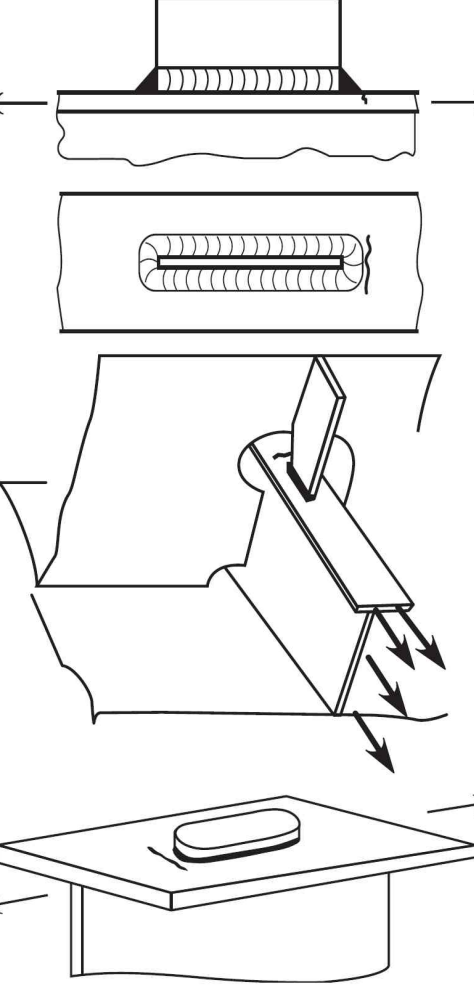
Toe distance for cruciform welded joints, transverse T-joints and plates with transverse attachment
